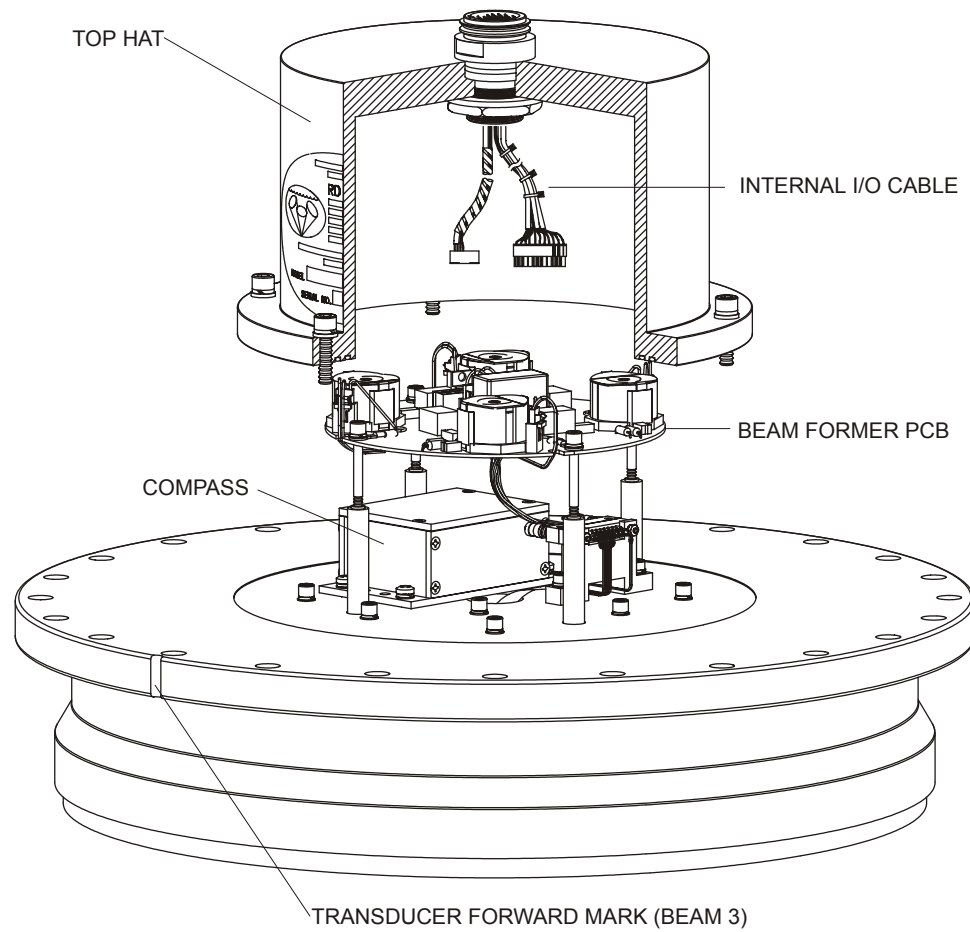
Transducer PCB Layout (75 kHz Transducer Shown)
